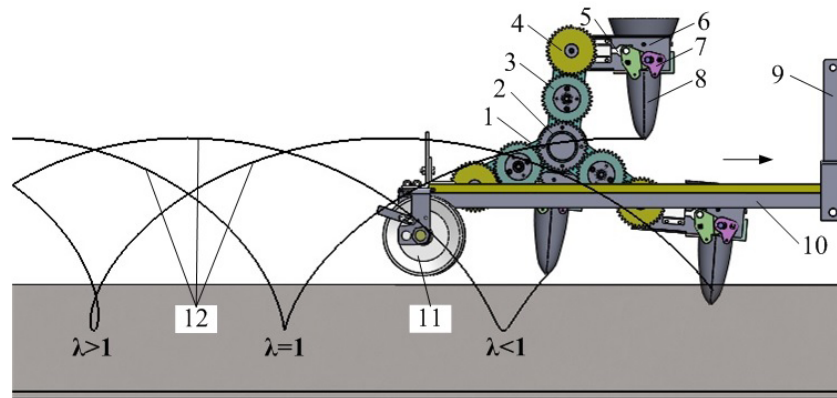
The structure schematics of the seedling planting mechanism: 1) planet carrier; 2) sun gear; 3) idle gear; 4) planet gear; 5) cam follower; 6) horizontal tumbler; 7) swinging link; 8) planting duckbill; 9) lifting mechanism; 10) frame; 11) soil covering ring; 12) planting trajectory.
